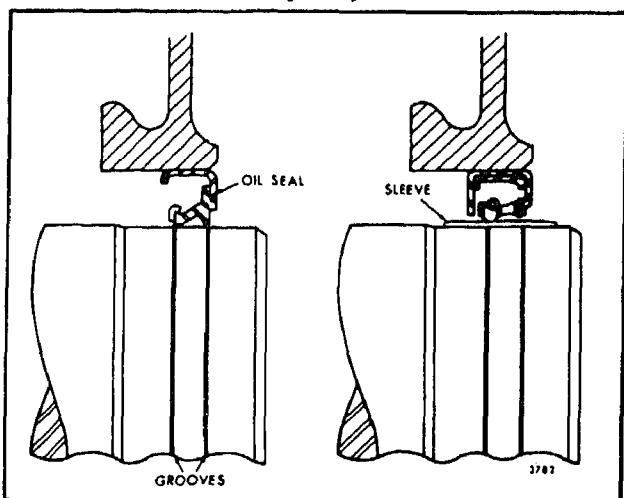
Use of Rear Oil Seal Sleeve on Grooved Crankshaft (In-line Engines)
